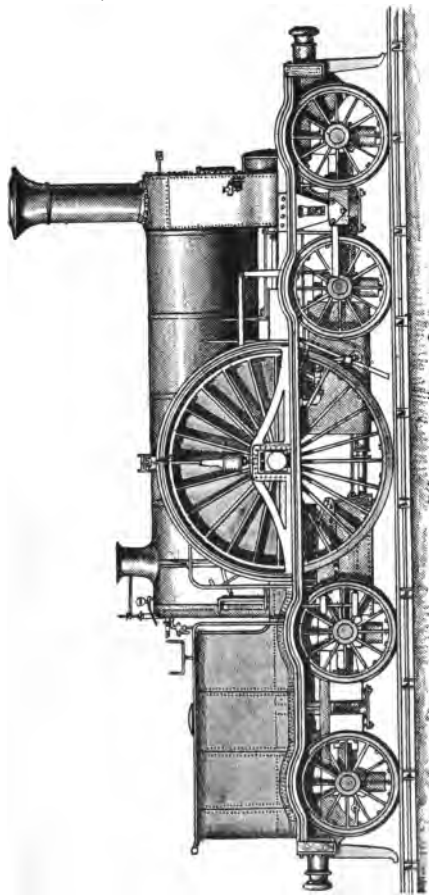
Bristol and Exeter Railway. Mr. Pearson's Tank Engine, 1853. Gauge 7 feet; driving-wheels 9 feet diameter (for details see p. 107).
